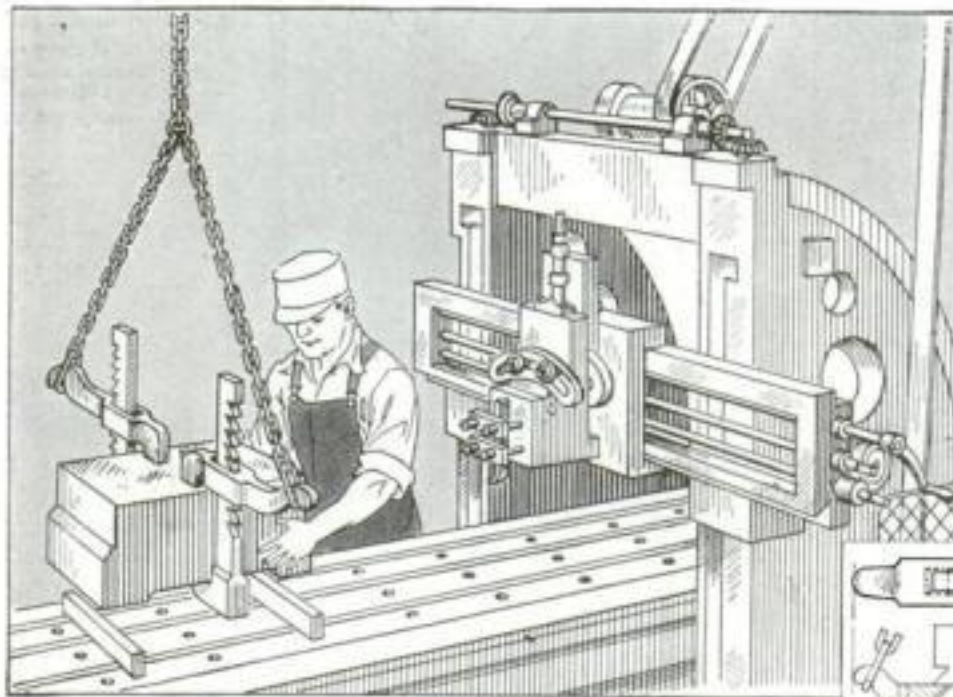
A foolproof lifting rig that can be readily adjusted to fit any size casting within reasonable limits.
